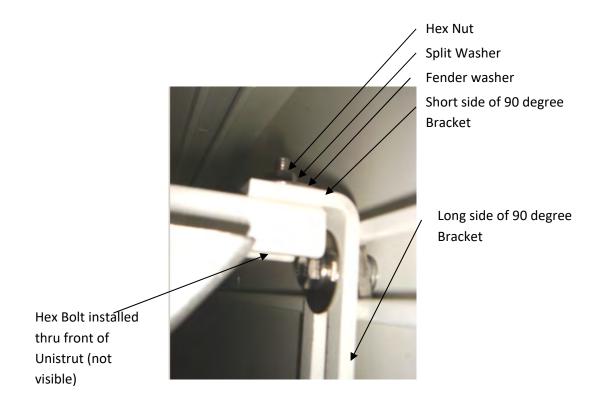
Top view of right side cylinder bracket assembly.
